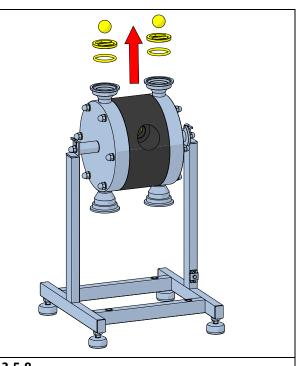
Pull out 2 x valve ball stops [22], Remove the sealing [18] and valve balls [23] from the pump housing [11L] and [11P].
